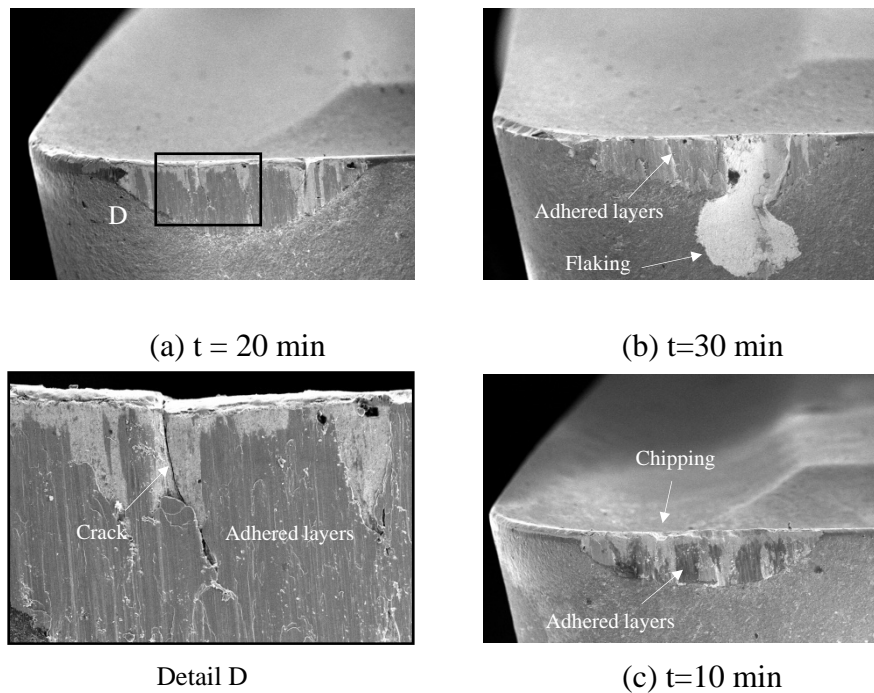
SEM micrographs of tool wear (insert 1) after dry machining of a) P20-AIR MELT, b) P20-ESR and c) DIN 1.2711 AIR MELT at cutting speed of 225 mm/min.
